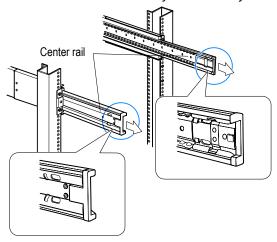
Pulling out the Center Rails toward You.
